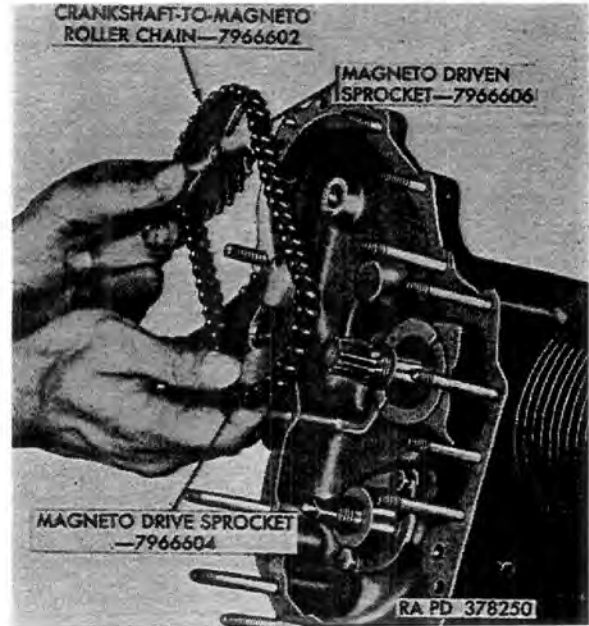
Removal of crankshaft-to-magneto chain and sprockets.
